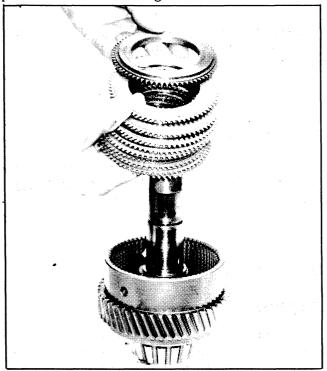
Removing or Installing Clutch Plates and Back Plate on Reverse Housing Gear.
